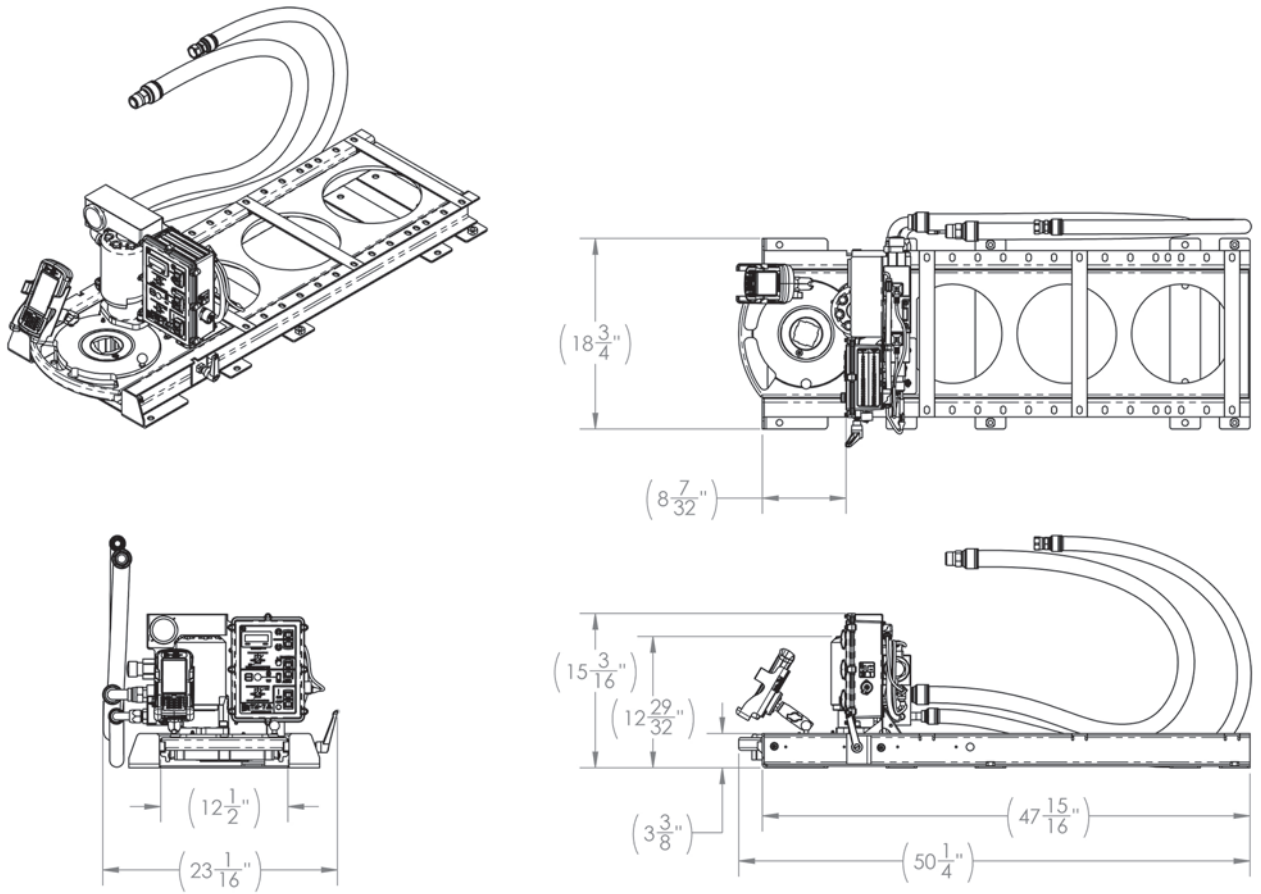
Overall dimensions for TM-7 configuration 17-000-30.
